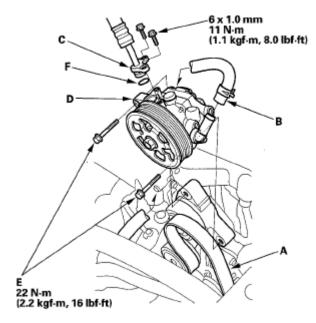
Identifying Drive Belt, Pump Inlet Hose, Pump Outlet Hose And Pump With Torque Specifications
